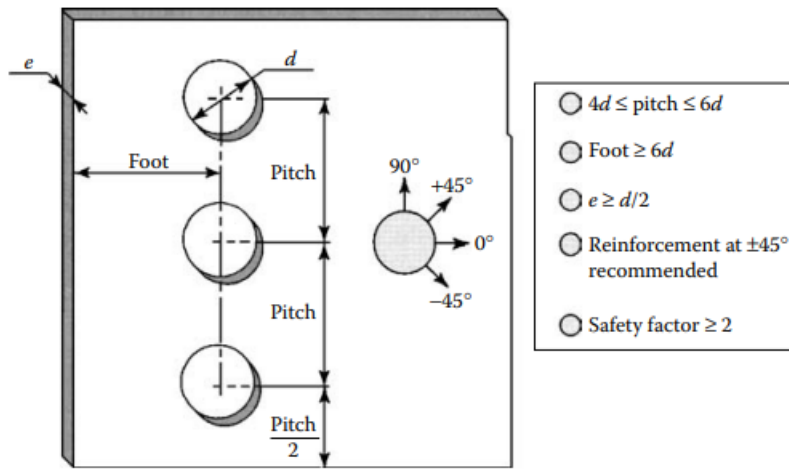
Recommended dimensions for holes in bolted joints for composite materials [72]
